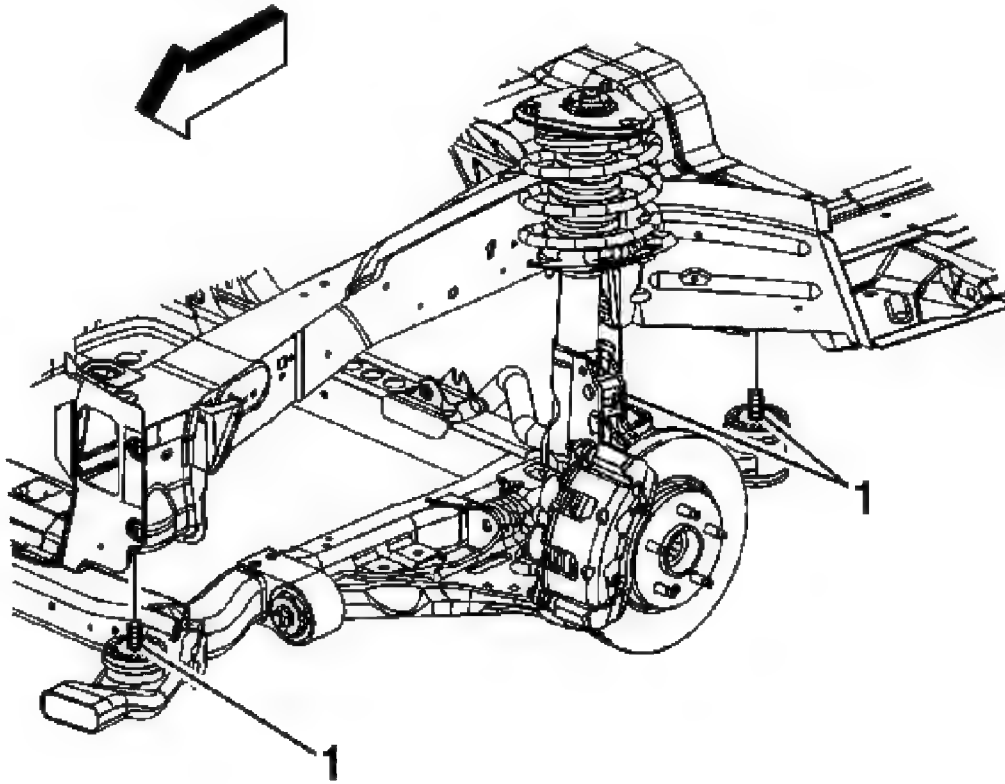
Identifying Rearward Engine Frame-To-Body Bolts
